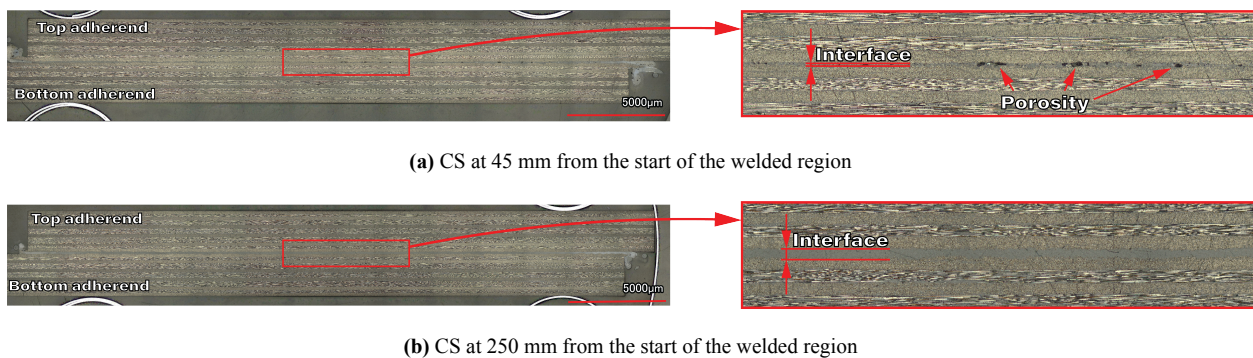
Cross sectional microscopy images of the weld performed at 13 mm/s
